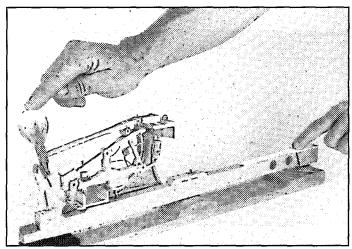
, left: Adjust checking distance by nudging backchecks forward or back with the fingers. Photo 6, right: Test that the tail will not drag on the backcheck on the way up.
